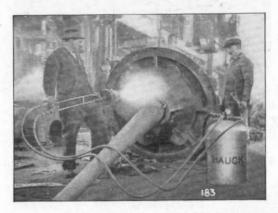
shows No. 2 Hauck Burner heating pipe for turning collar for flanging. Hauck Burners are indispensable for removing and replacing crank shaft pins, machine shop repairs, melting babbitt out of bearings, shrinking and expanding.
